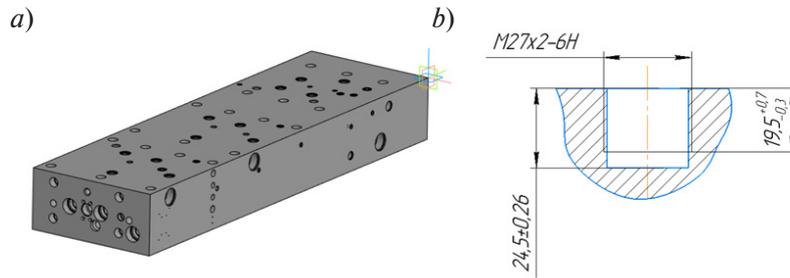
a) solid model of the “Plate”; b) the sketch of threaded hole
